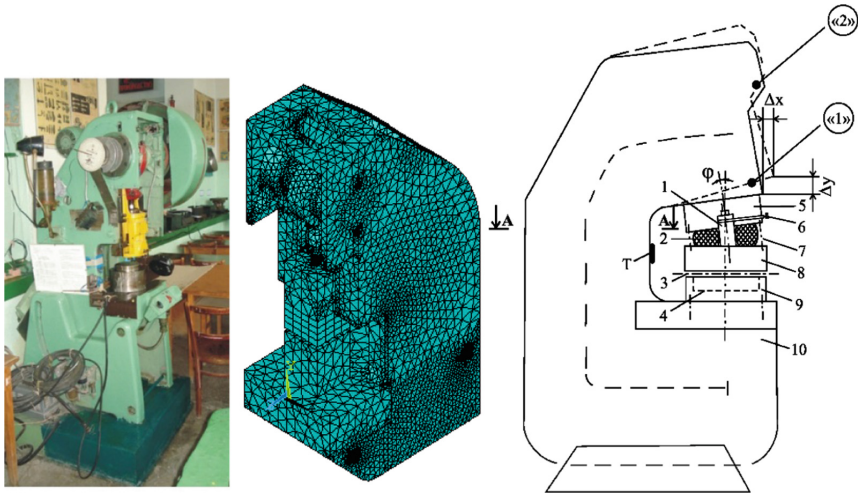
Photo of open-type crank press, its solid model; scheme of mounting the upper die plate to a press slider. 1 – shank; 2 – compensator; 3 – die line connector; 4 – circuit of a formed product; 5 – slider; 6 – fixing pin; 7 – fasteners; 8 – upper plate; 9 – lower plate; 10 – frame; φ – skew angle of the slider; “1” and “2” – displacement measurement point (Δ); Δx and Δy – horizontal and vertical movement; T – electrical strain gauges.
